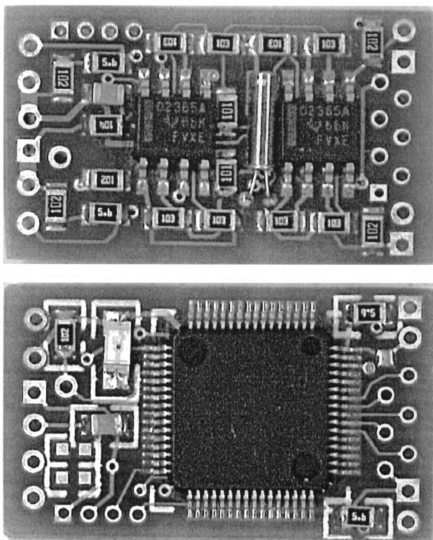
Pictures of the soldered Signal Processing and Data Acquisition Unit.
